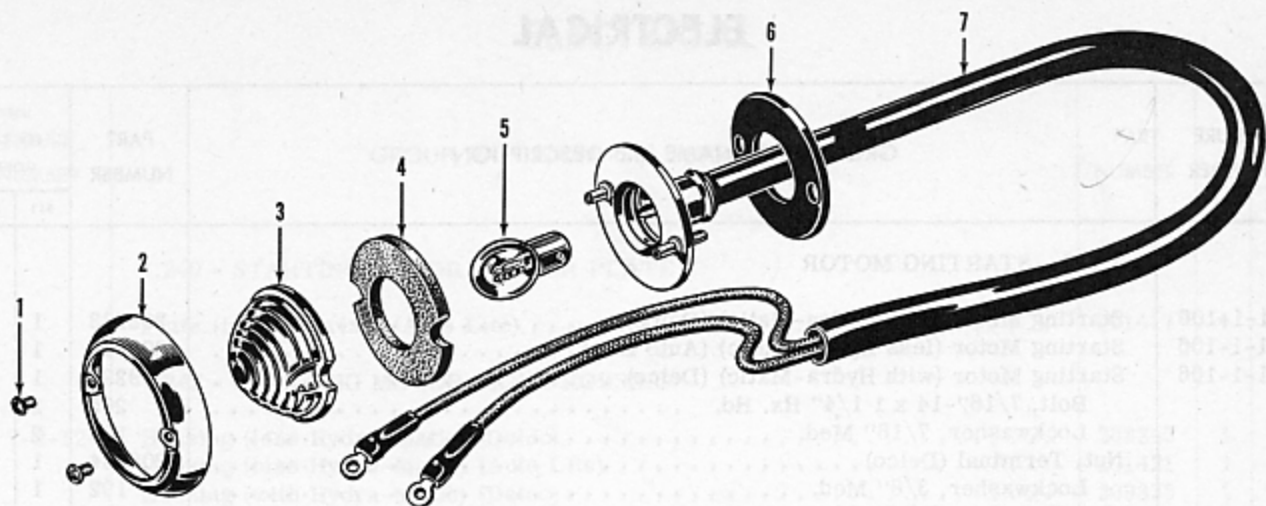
PARKING AND DIRECTIONAL LIGHT - EXPLODED VIEW
